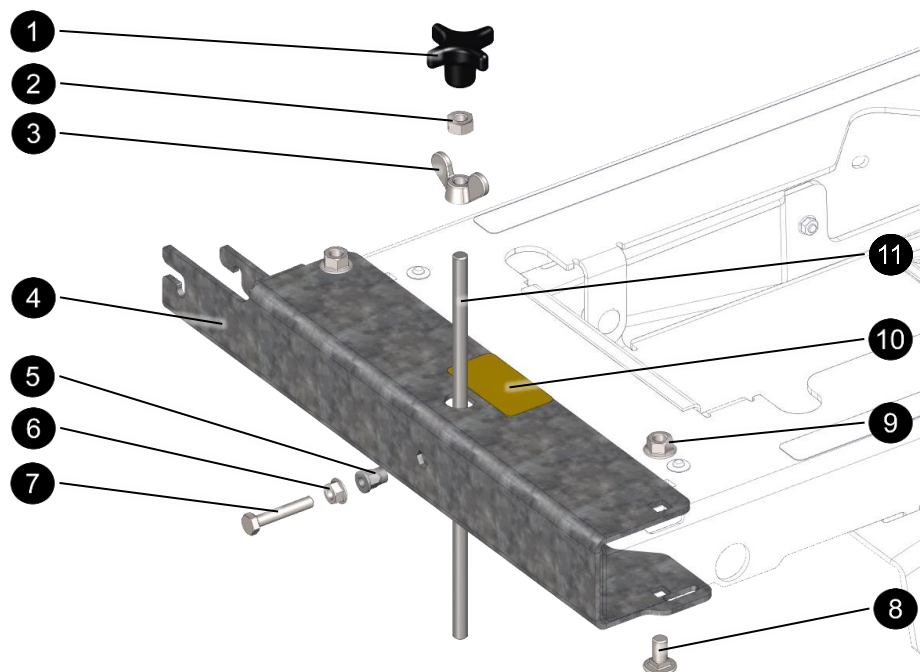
Spare parts for the WR 870 battery/battery PRO support wheel mount
